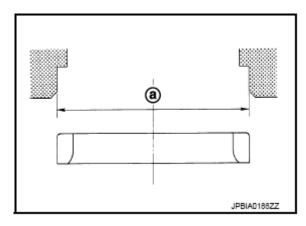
Identifying Cylinder Head Recess Diameter Courtesy of NISSAN NORTH AMERICA, INC.
